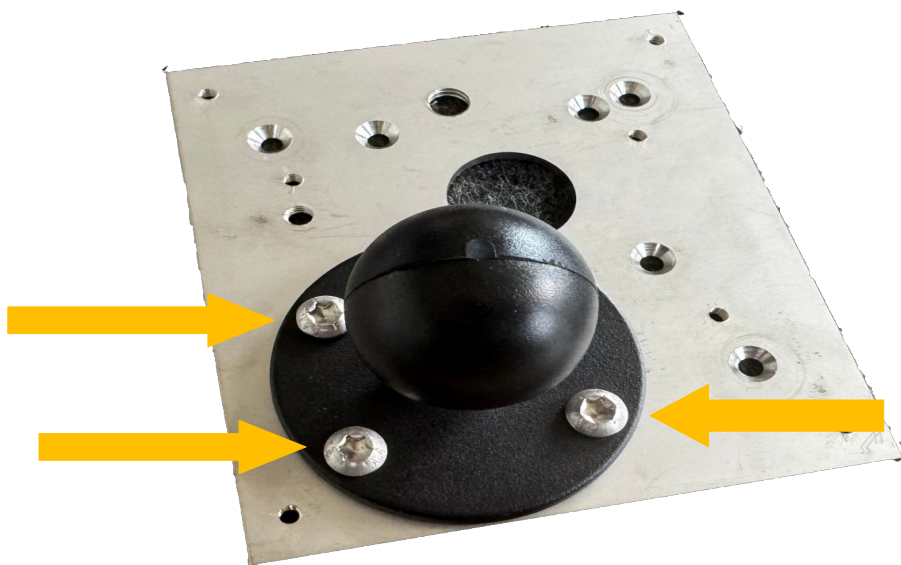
Attachment of ball head to MRX.mountigPlate
